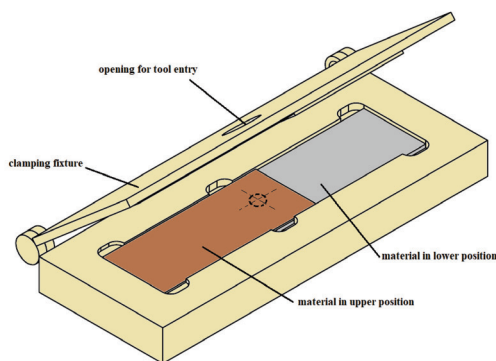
Clamping fixture for producing test assemblies by thermal drilling.
